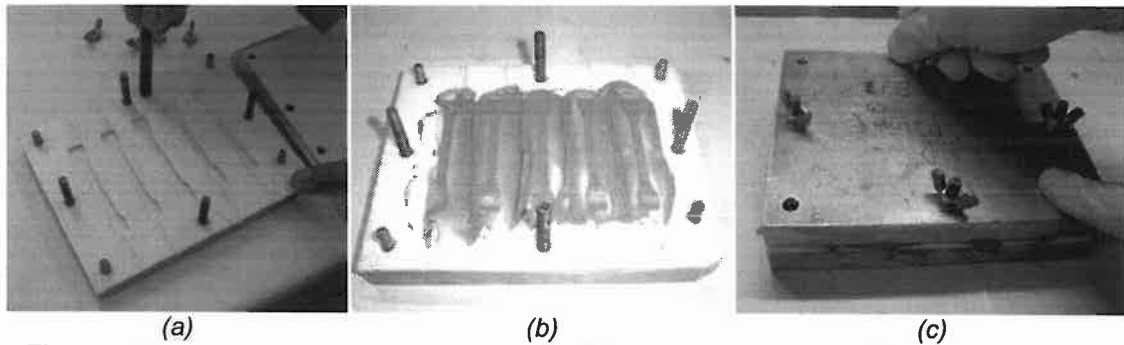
Preparation of the test specimens: (a) test specimen mould, (b) resin casting, and (c) applying pressure.
